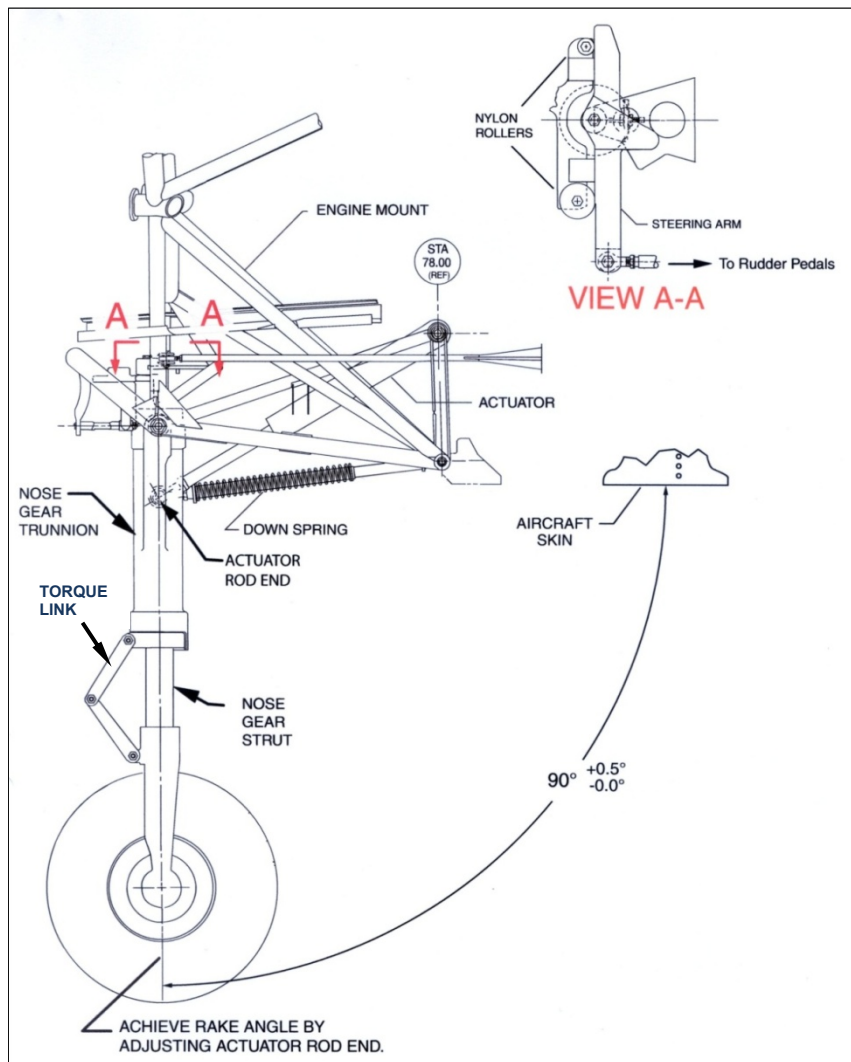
Nose gear of the Piper PA46-500TP, view from the left
